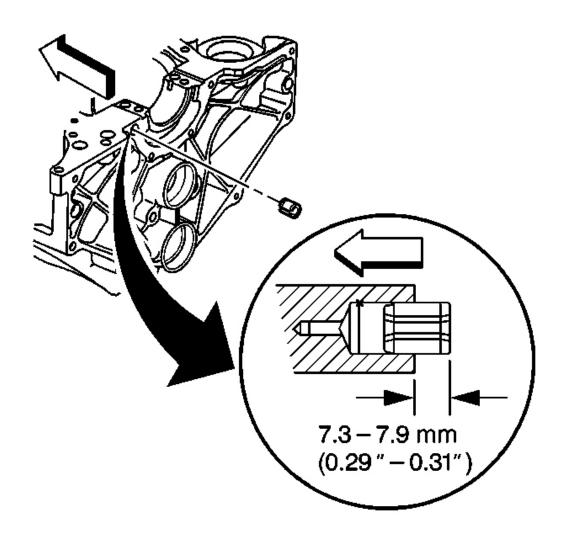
Installing Crankshaft Rear Oil Seal Housing Locator Spring Courtesy of GENERAL MOTORS CORP.
